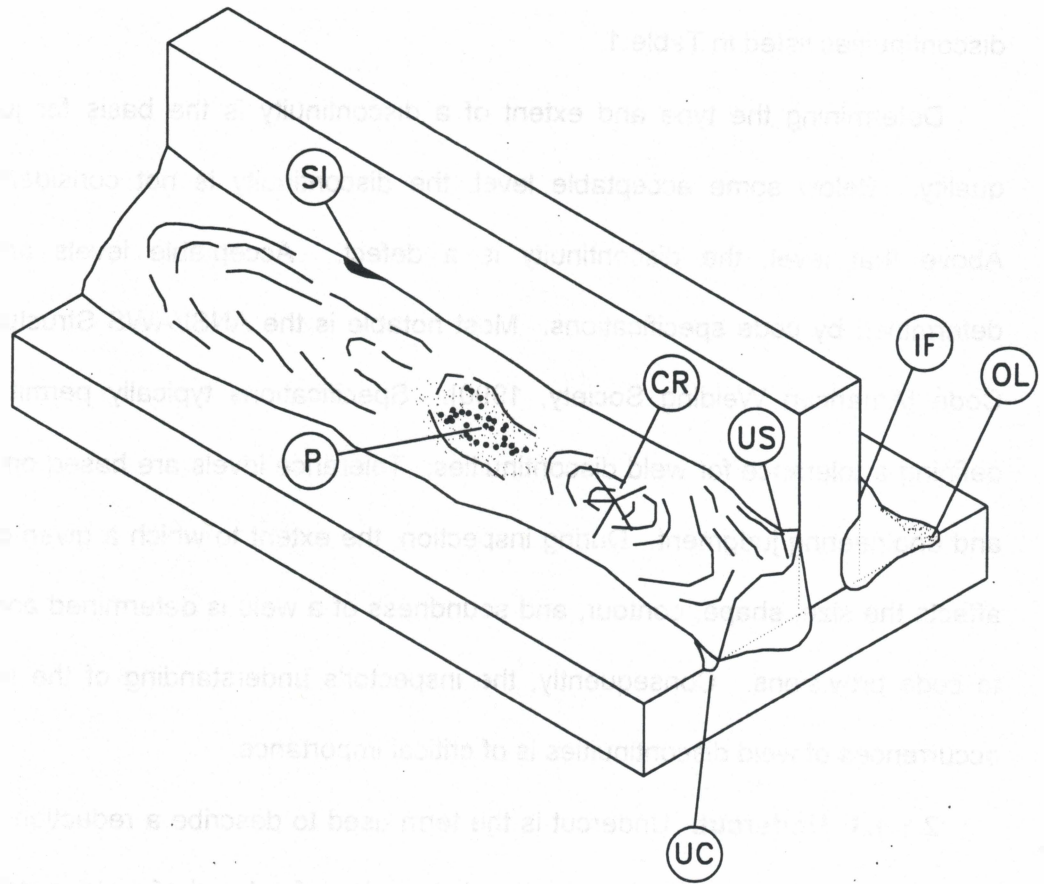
Fillet Weld Discontinuities in a T-Joint
